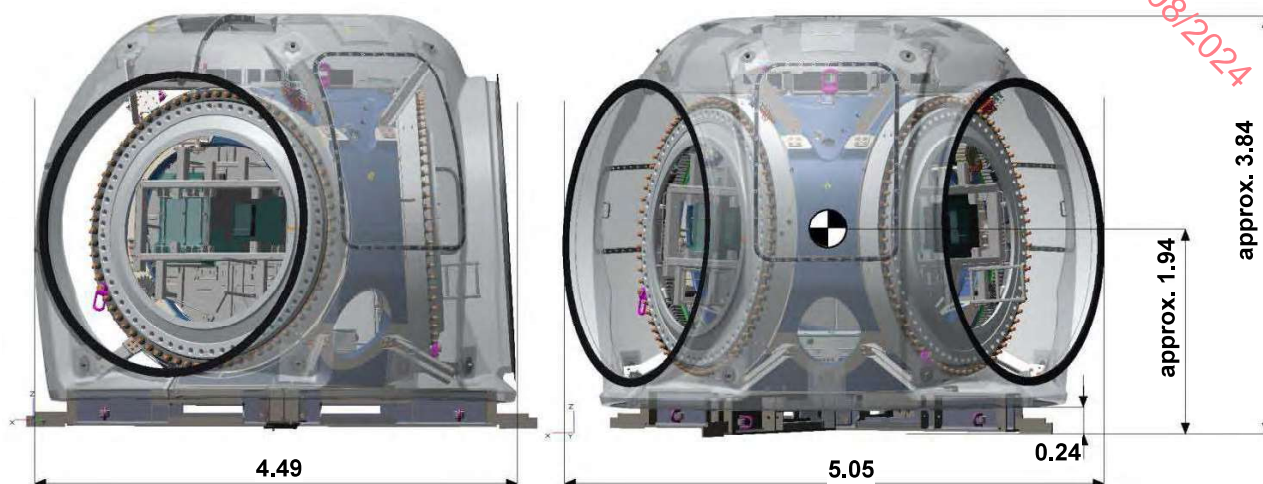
Rotor hub N100, N117 on the transport frame (dimensions in m)
